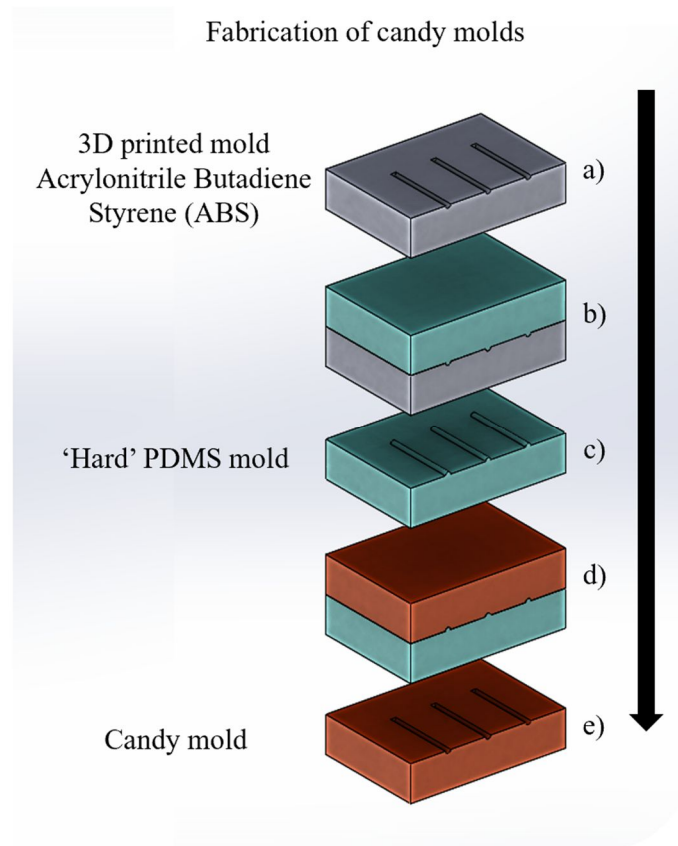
Overview of the steps to fabricate candy molds. a) 3D printed master mold; b) soft lithography to fabricate hard-PDMS mold; c) hard-PDMS mold; d) super soft lithography to fabricate candy mold; e) Candy mold.
